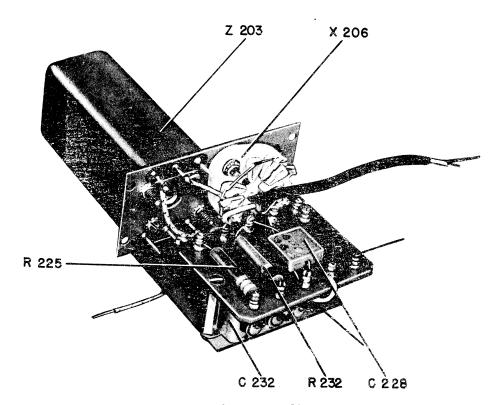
Receiver 3rd I-F Assembly - Bottom View
